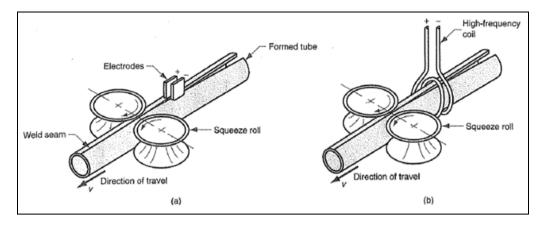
Welding of tube seams by (a) high frequency resistance welding and (b) high-frequency induction welding
